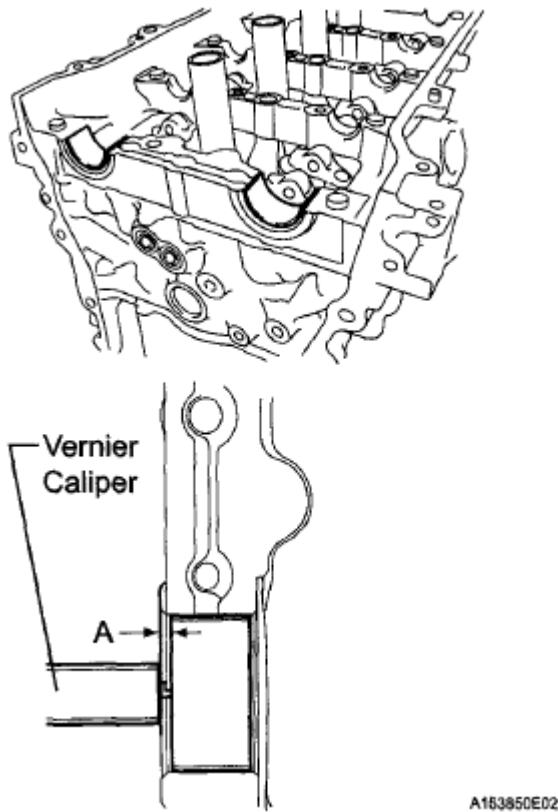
Measuring Distance Between Bearing Cap Edge And Camshaft Bearing Edge
